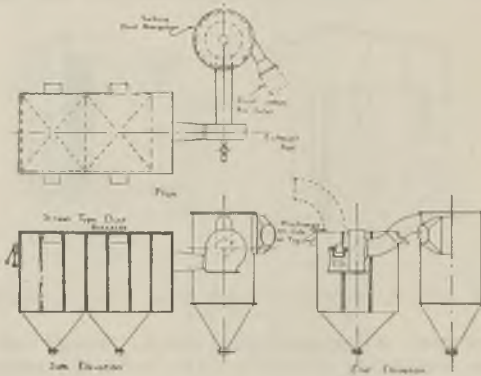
A DOUBLE GRIP DUST COLLECTING SYSTEM.
